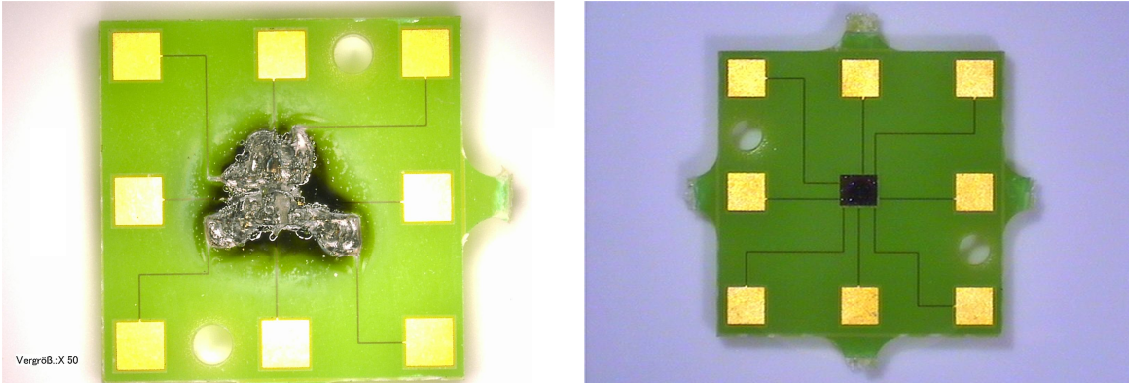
Destroyed assembly (left) and flipped LM358 die on PCB (right)
